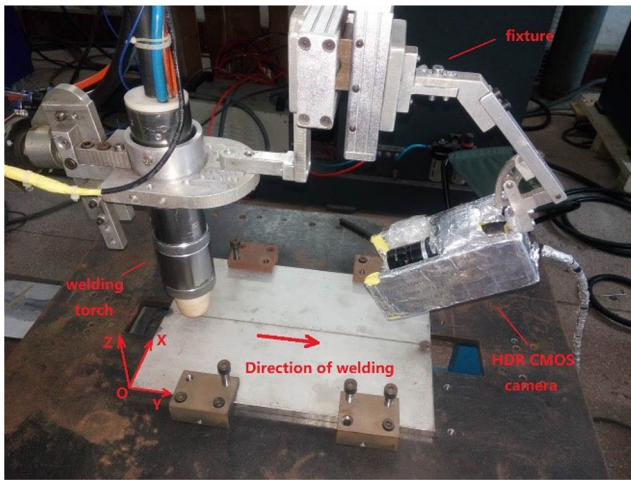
Torch, camera fixture installation, and welding direction
